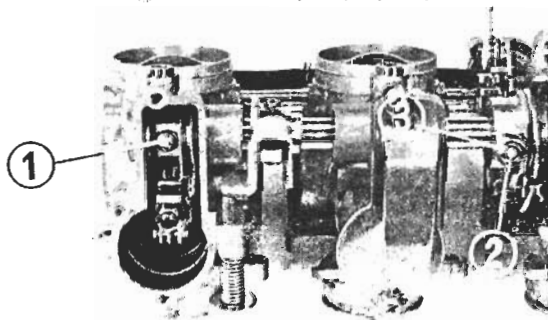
(1) Link arm fixing screw (2) Set screw (3) Lock nut
